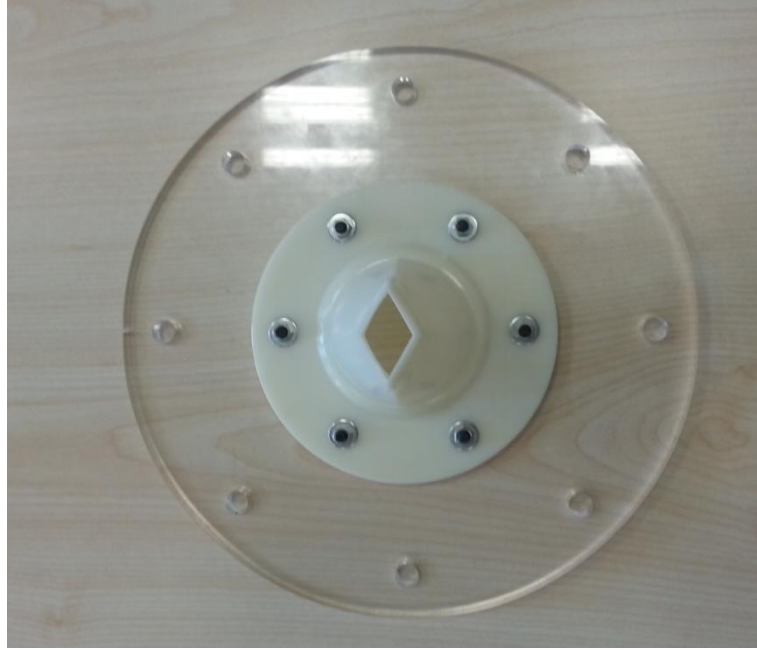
3D printed Rhombus type nozzle connected to the connector part.
